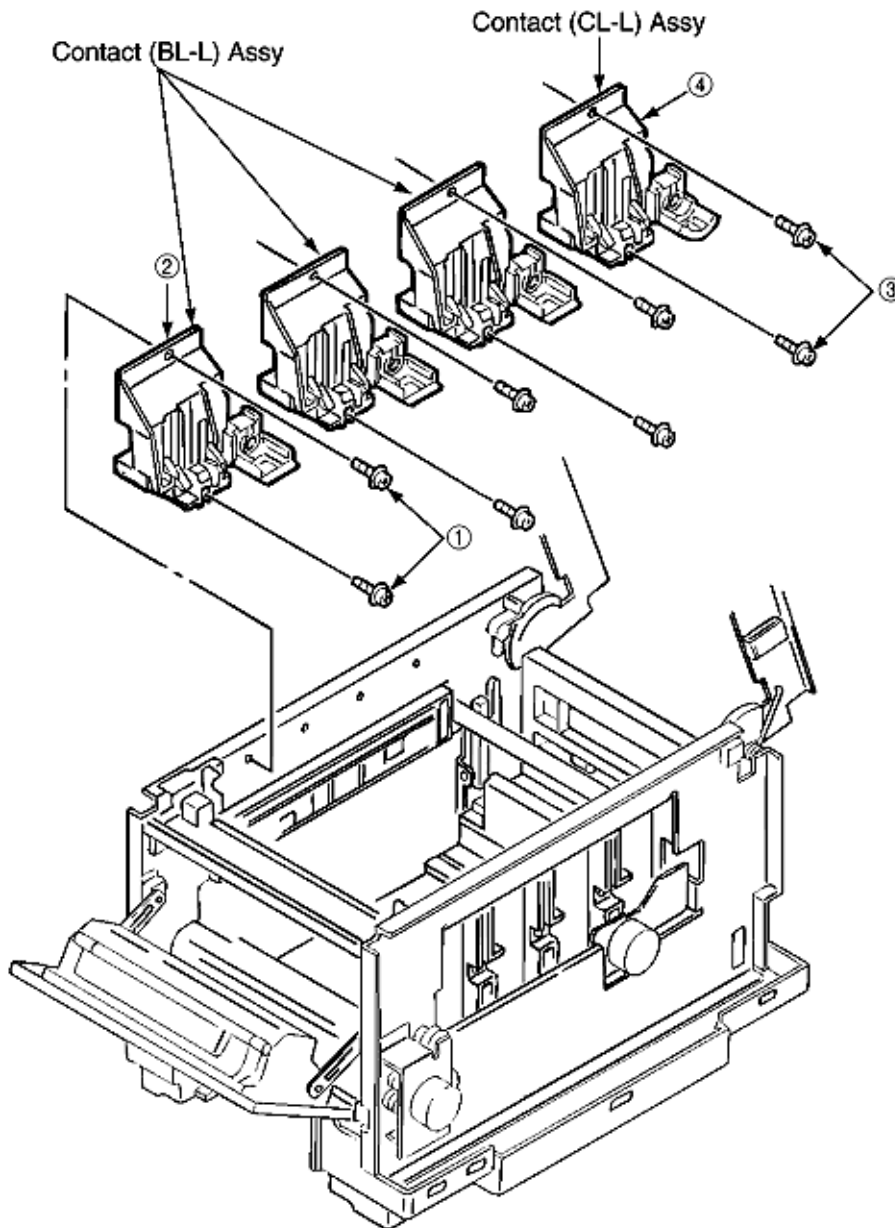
Contact (BL-L) Assy, Contact (CL-L) Assy
